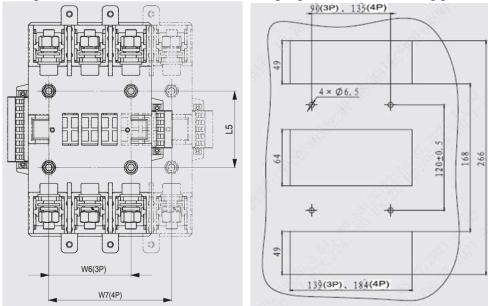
Opening dimension drawing of safety rotating plate of plug-in sok=cket and installation dimension drawing of wiring products behind the plate
